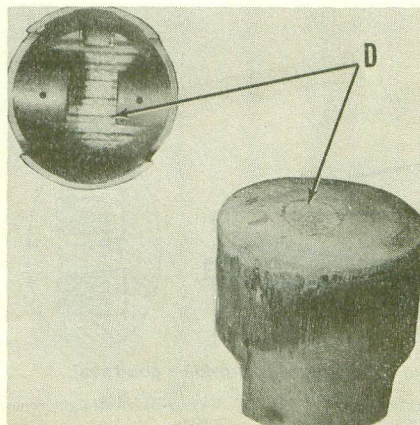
If parts are excessively damaged, cause should be determined and corrected before returning motor to service.
